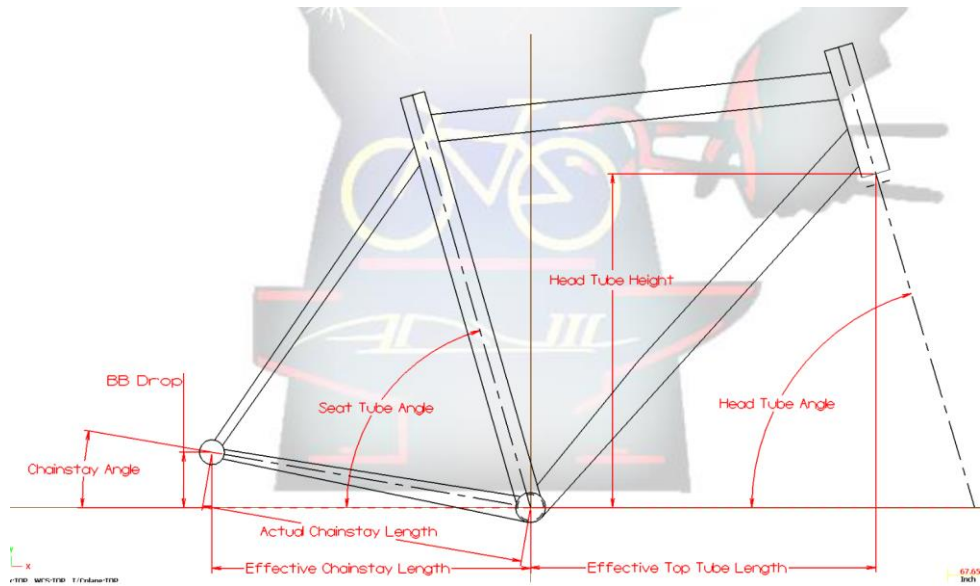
Dimensions needed to setup Anvil Journeyman fixture
